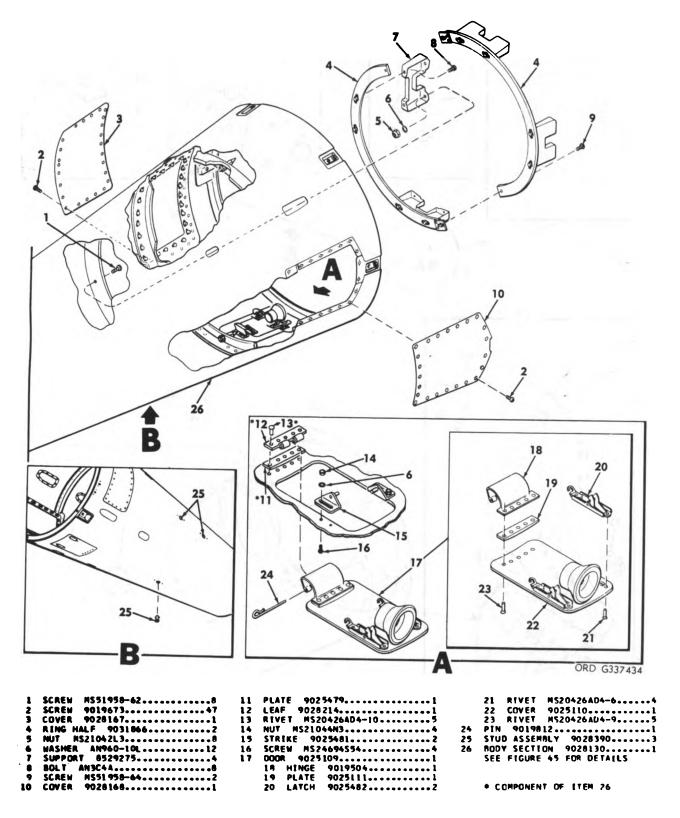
BODY SECTION, GUIDED MISSILE /9028135/ /SEE FIGURE 43 FOR NEXT HIGHER ASSEMBLY/
